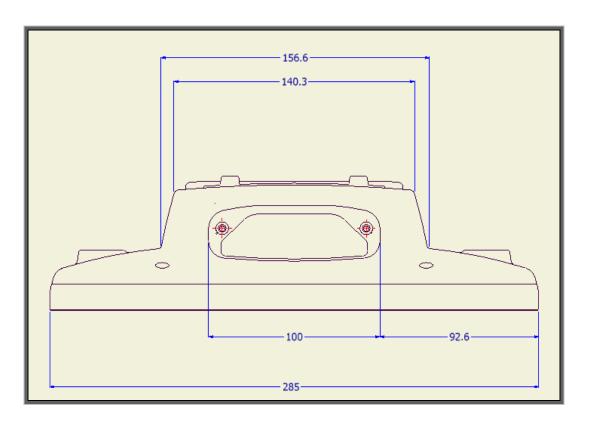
Dimensions DLoG MTC 6/10 top view
